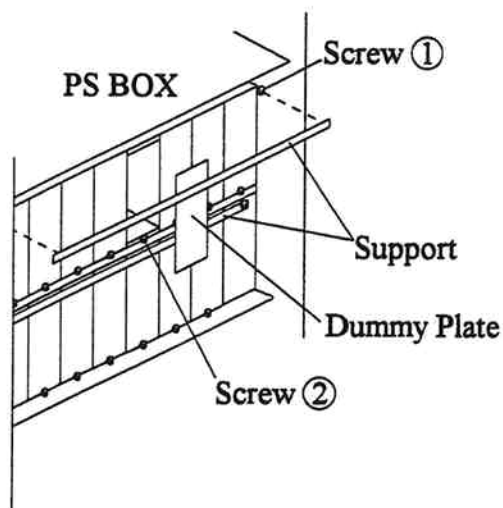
Attachment of Dummy Plate
